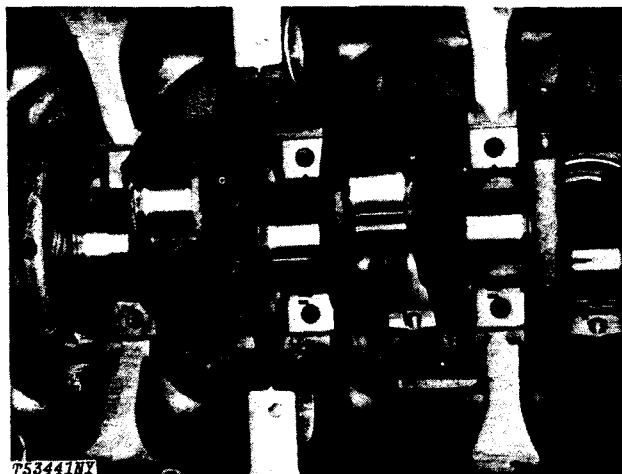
Connecting Rod and Main Bearing Caps Removal
